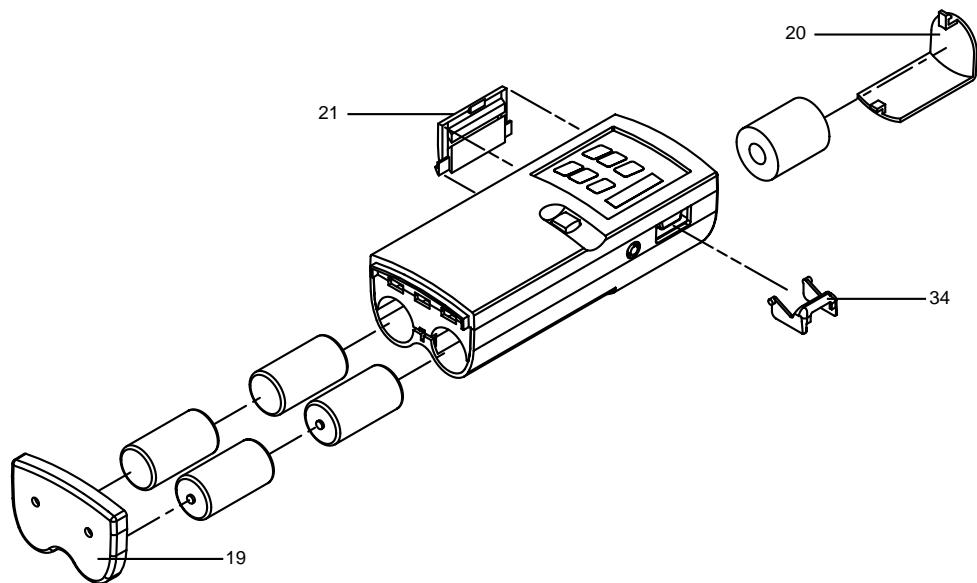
Sensor Lock, and Printer, Paper, and Battery Access Doors
